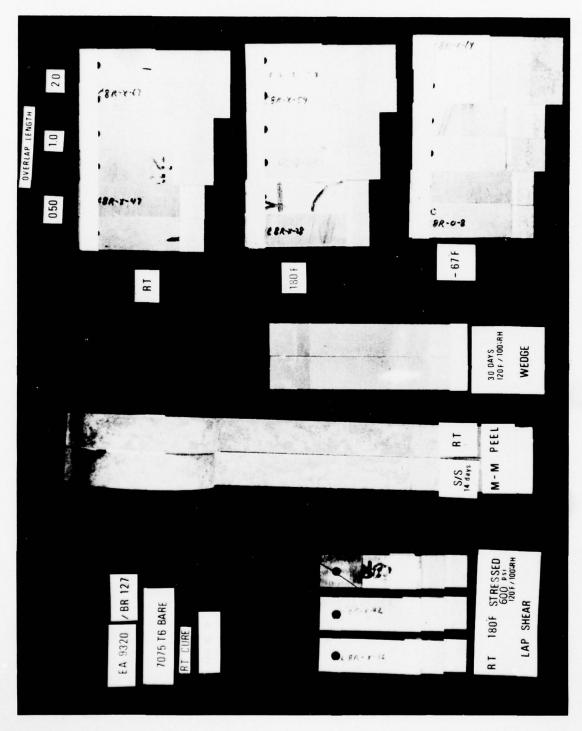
Specimen Failure Surfaces—EA 9320, PasaJell 105, RT Bonds
